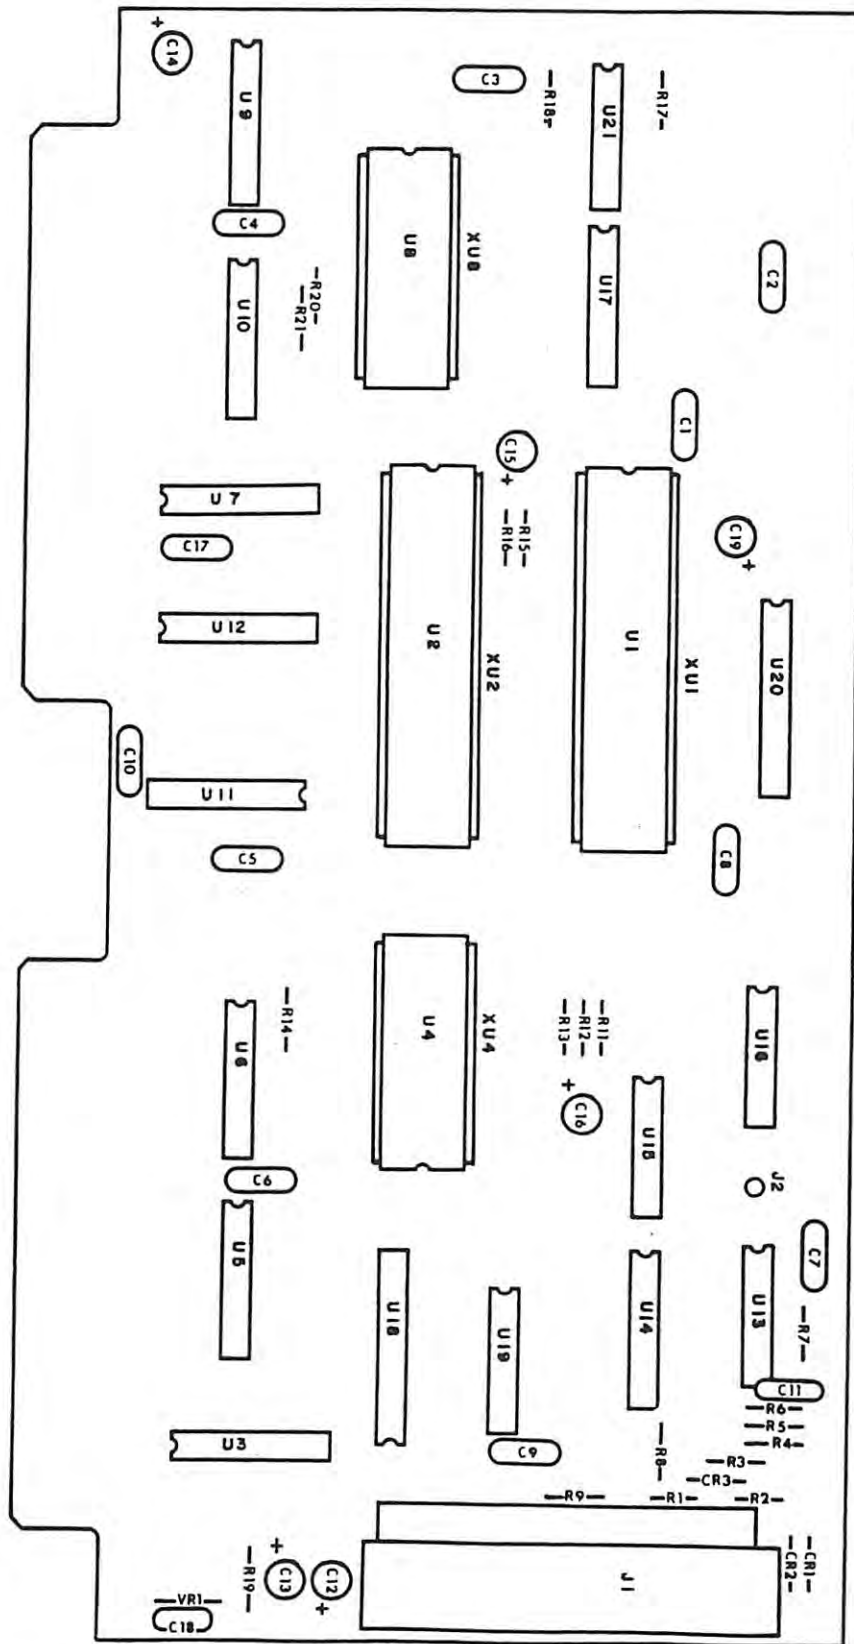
Type 796056-1 Front Panel Encoder Board (MFP A1A1), Location of Components
